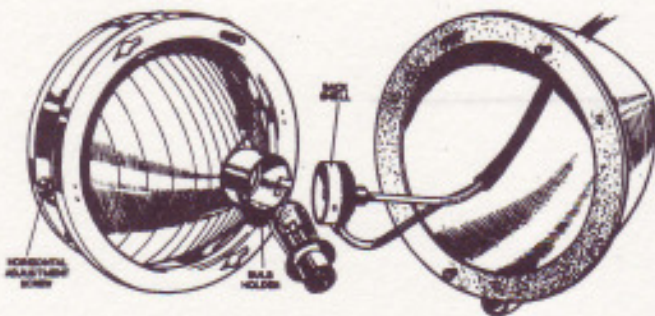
HEADLAMP WITH LIGHT UNIT REMOVED.
